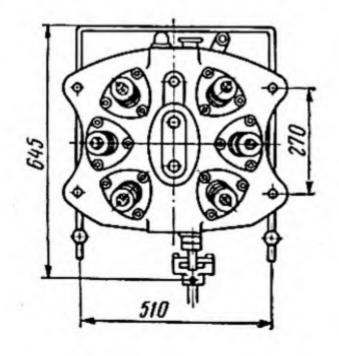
General view and dimensions of the BMB-10 oil circuit breaker:
